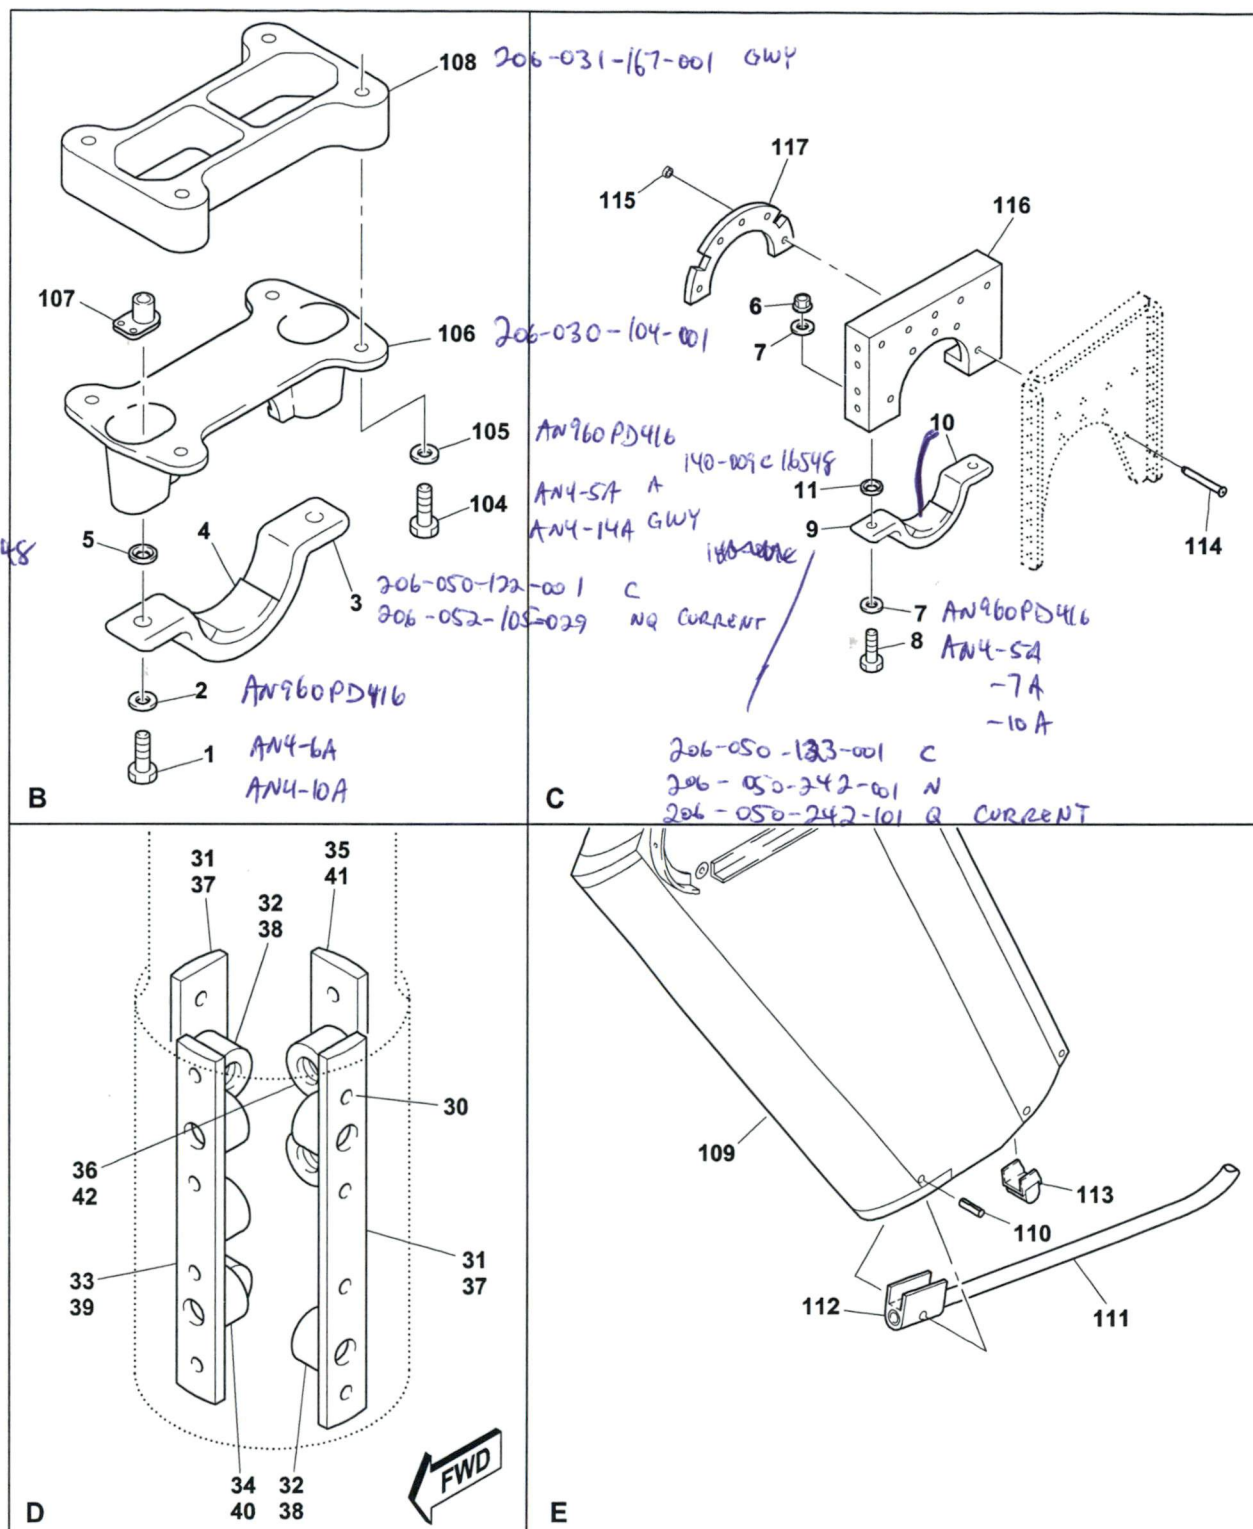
Landing Gear and Support Assemblies, Standard Low; and Skid Assembly, Tail
